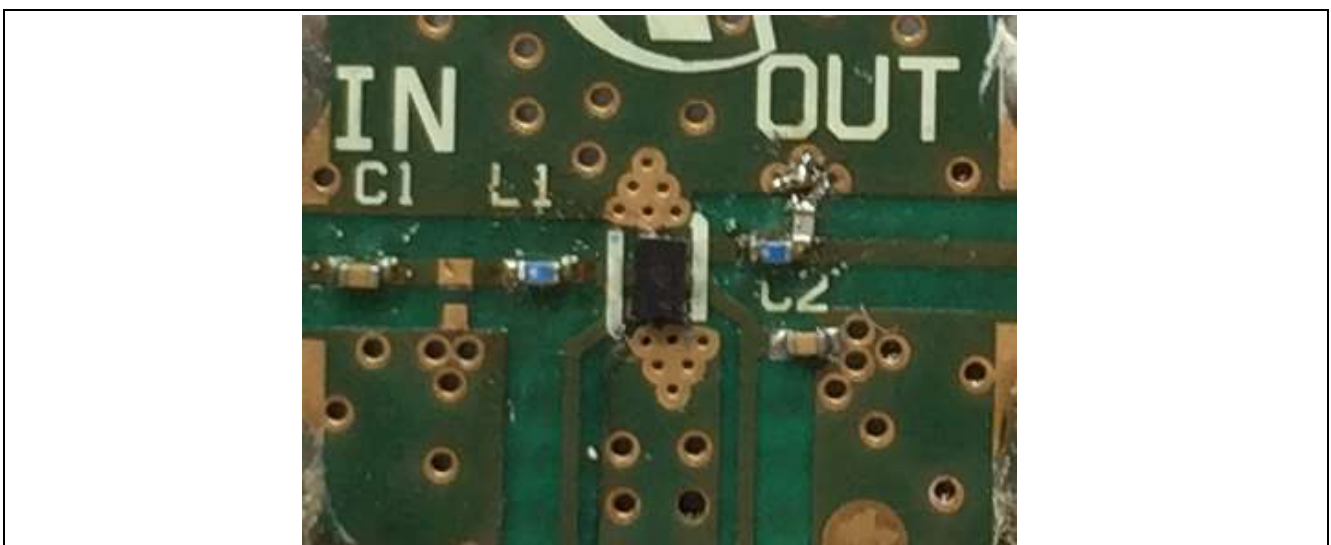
Photo Picture of the Evaluation Board (detailed view)
